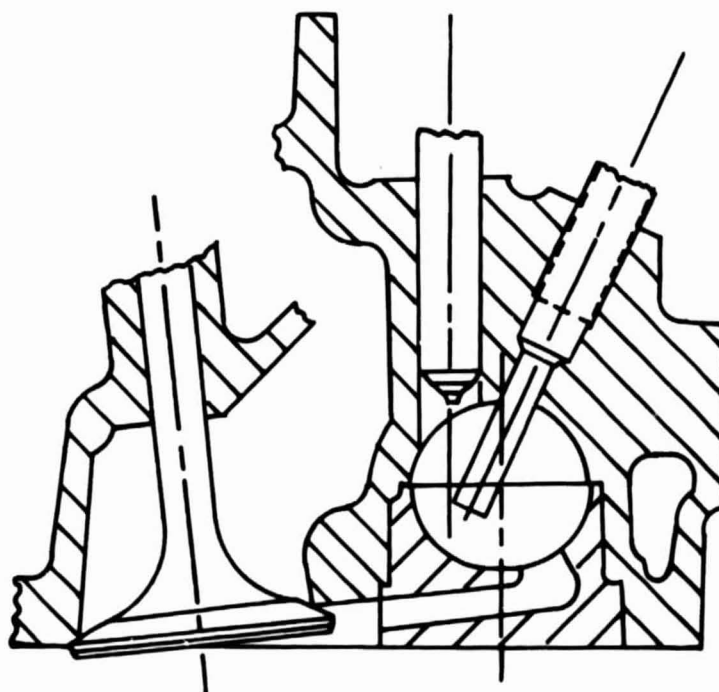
Section View - Olds Combustion Chamber (Ref. 28)
